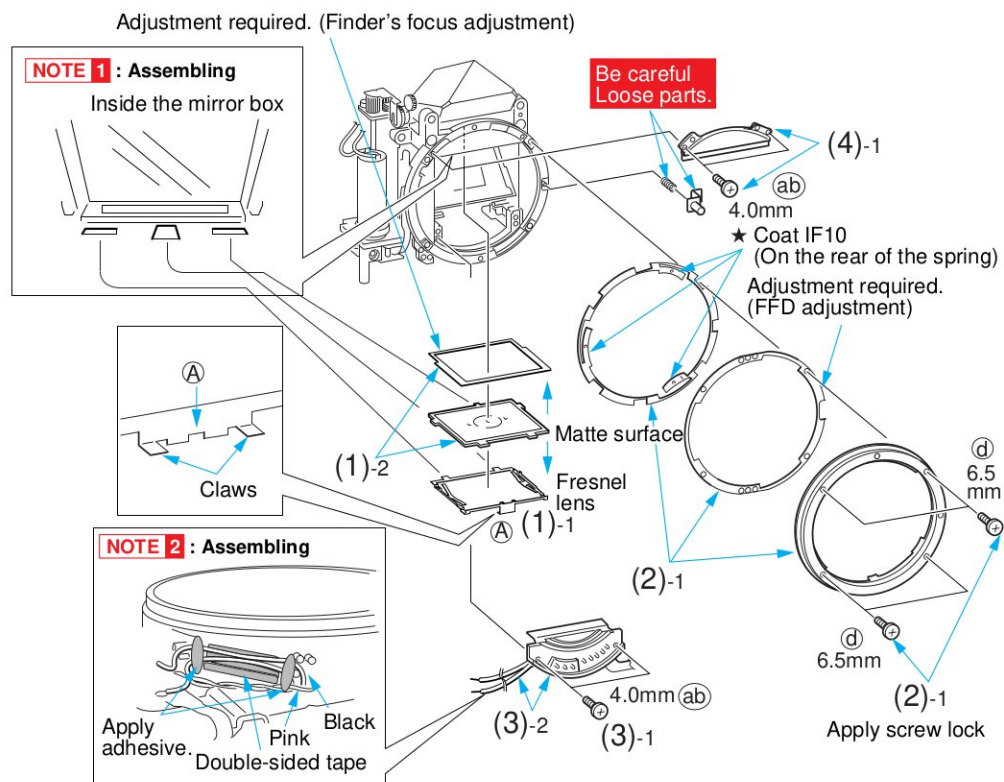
Focusing screen, lens mount and lens mount contact assembly
